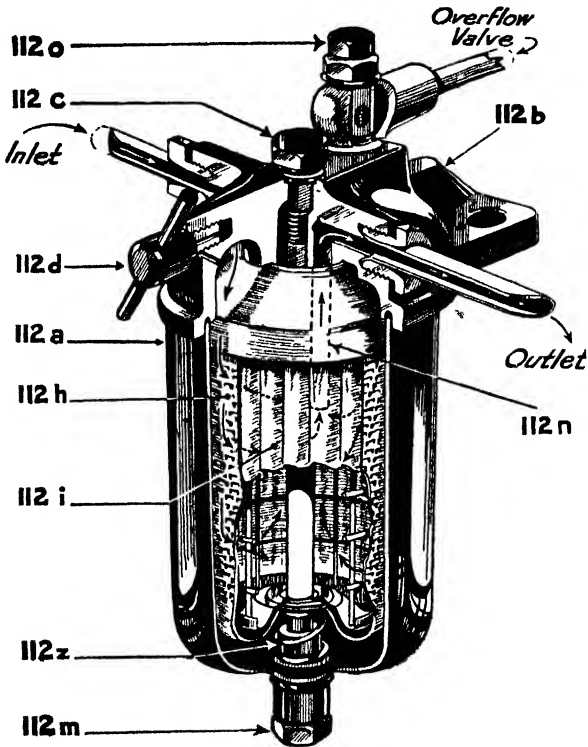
The Bosch Cloth Element Fuel Filter, Type BF11B.
